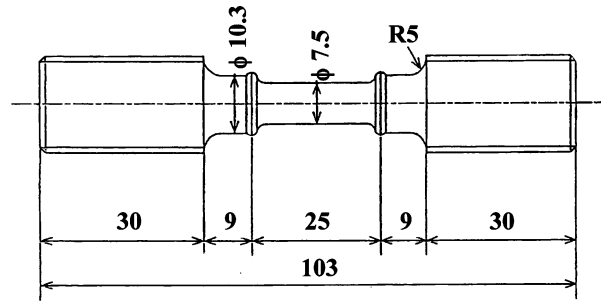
Shape and dimensions of the creep test specimen in millimeters.
